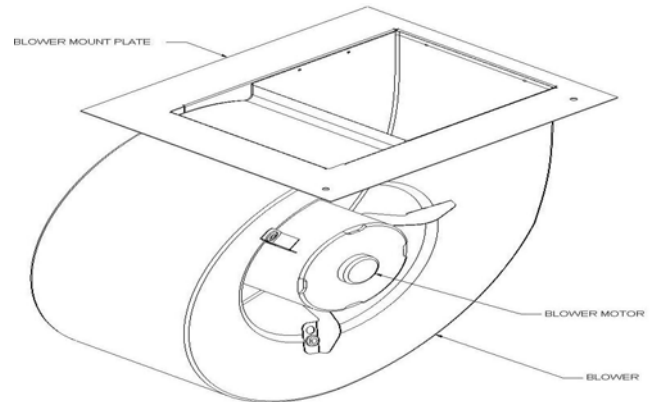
Blower Assembly and Mounting Screw Location – B/S02 / B/S03 / WCW
